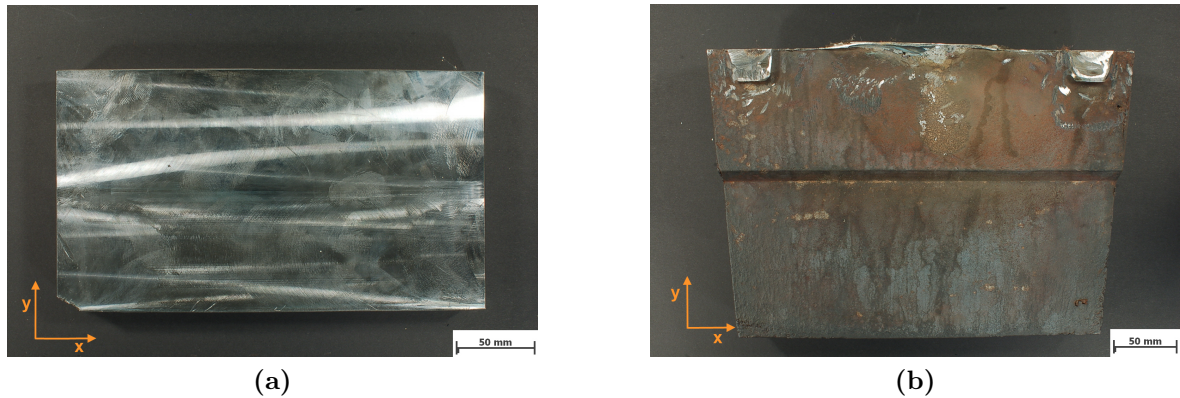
Cast material test plate 3.1a and weld plates 3.1b in as-received state.
